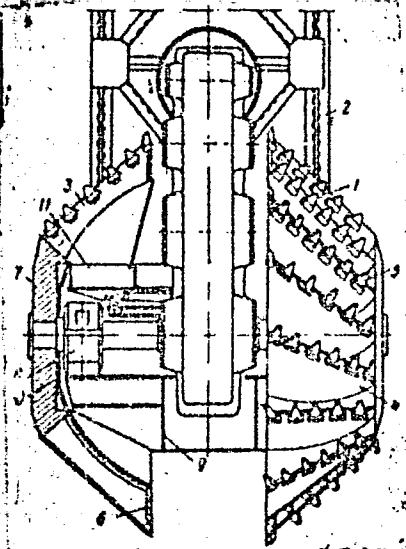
1- rotary working unit; 2- boom; 3- conical rotors; 4- lug-mounted convex cutter; 5- armored teeth; 6- ring; 7- hub; 8- protruding roller of the anchor drive reducer; 9- bearing beam; 10- spherical shell; 11- ring feeder with a drive mechanism
